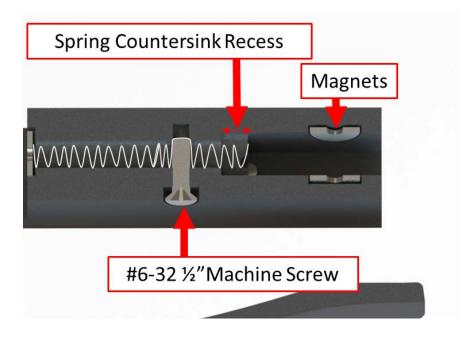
Spring, magnet, and machine screw placement in UHAT main body activity insert receptacles.
